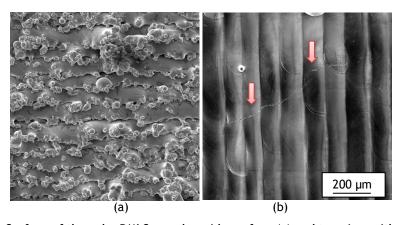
Surface of the cube DMLS samples: side surface (a) and top view with microcracks (b).
